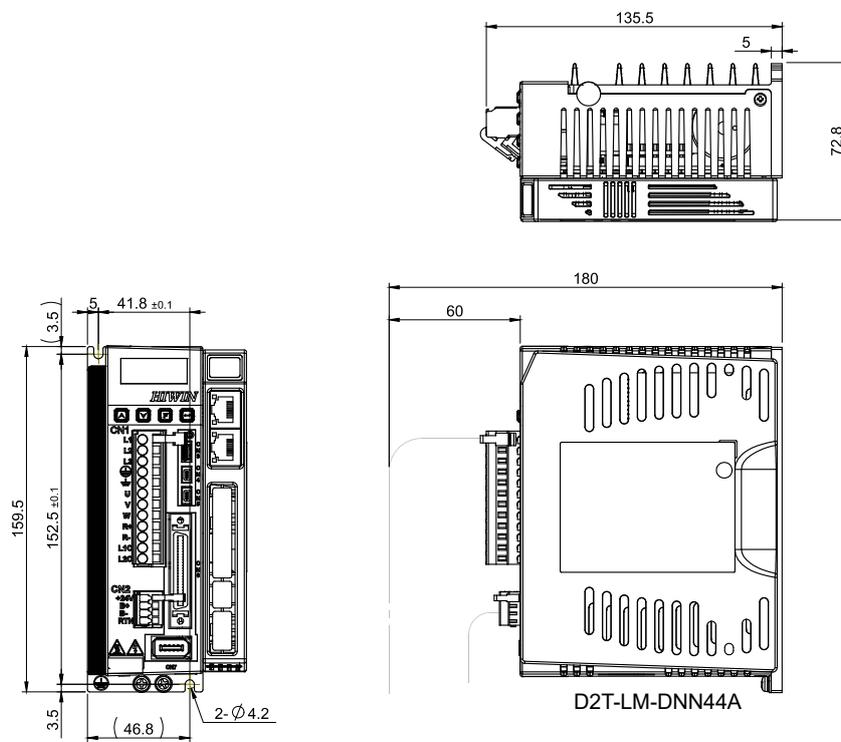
Dimensions of D2T-LM Frame B (Fieldbus)
